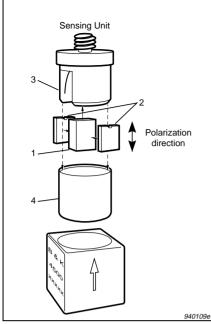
Exploded view of Cubic Accelerometer Type 4500 showing the ThetaShear  $^{\circledast}$  design
